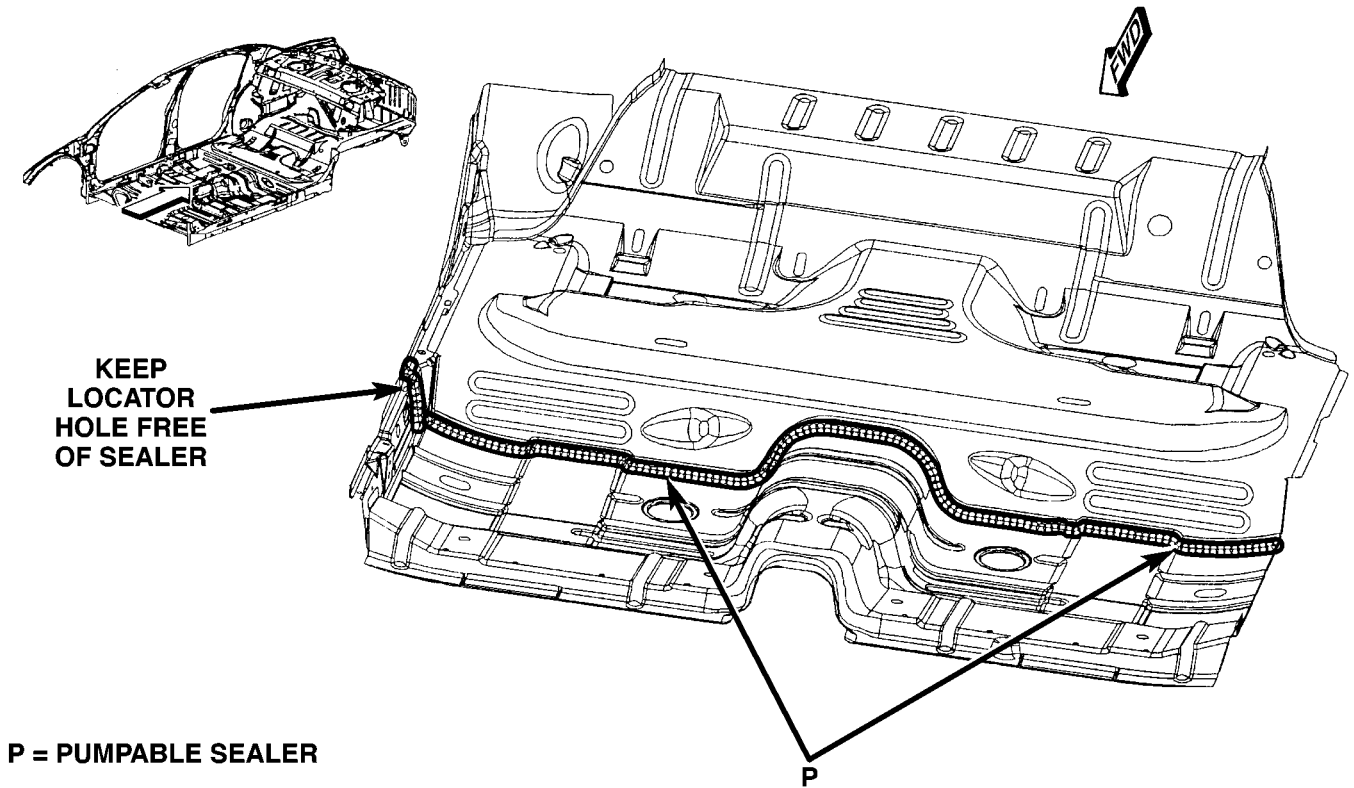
FRONT FLOOR PAN TO REAR FLOOR PAN
